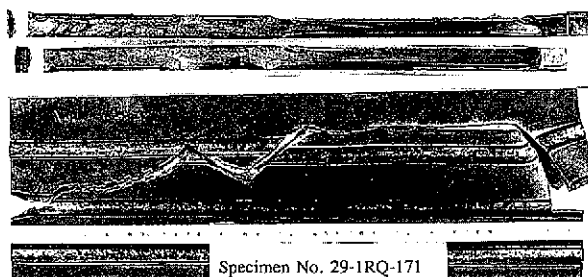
Appearance of 18-mm thick bead-on-plate test specimen
